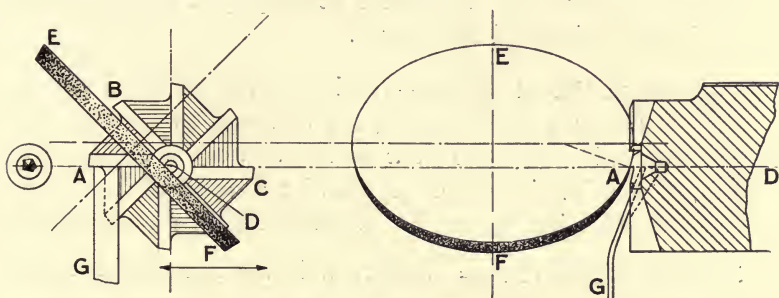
SHARPENING END MILLS AND ANGULAR CUTTERS WITH TEETH CUT CLOSE TO AXIS
